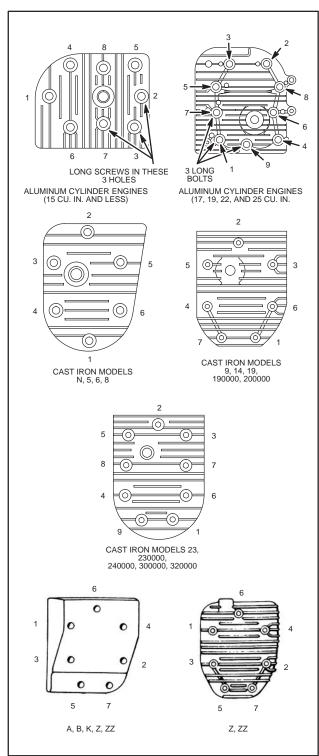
TORQUE PATTERN, CYLINDER HEADS
